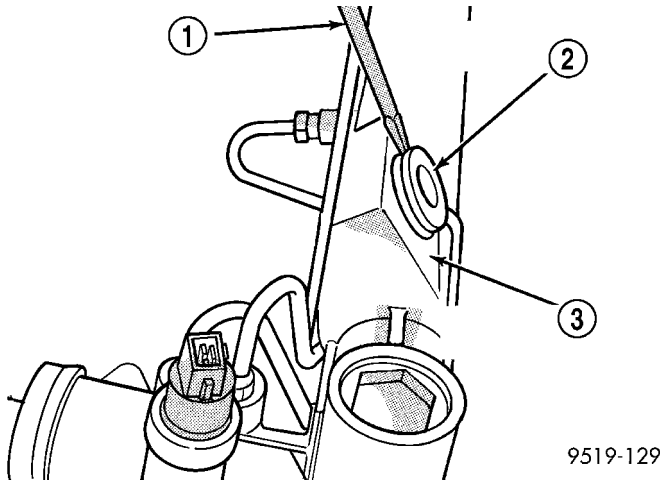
Mounting Bolt Isolator Sleeve Removal
